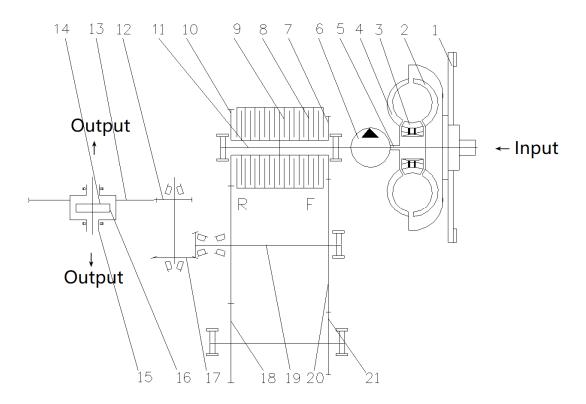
The schematic diagram of JHTY30B hydraulic transmission gearbox
